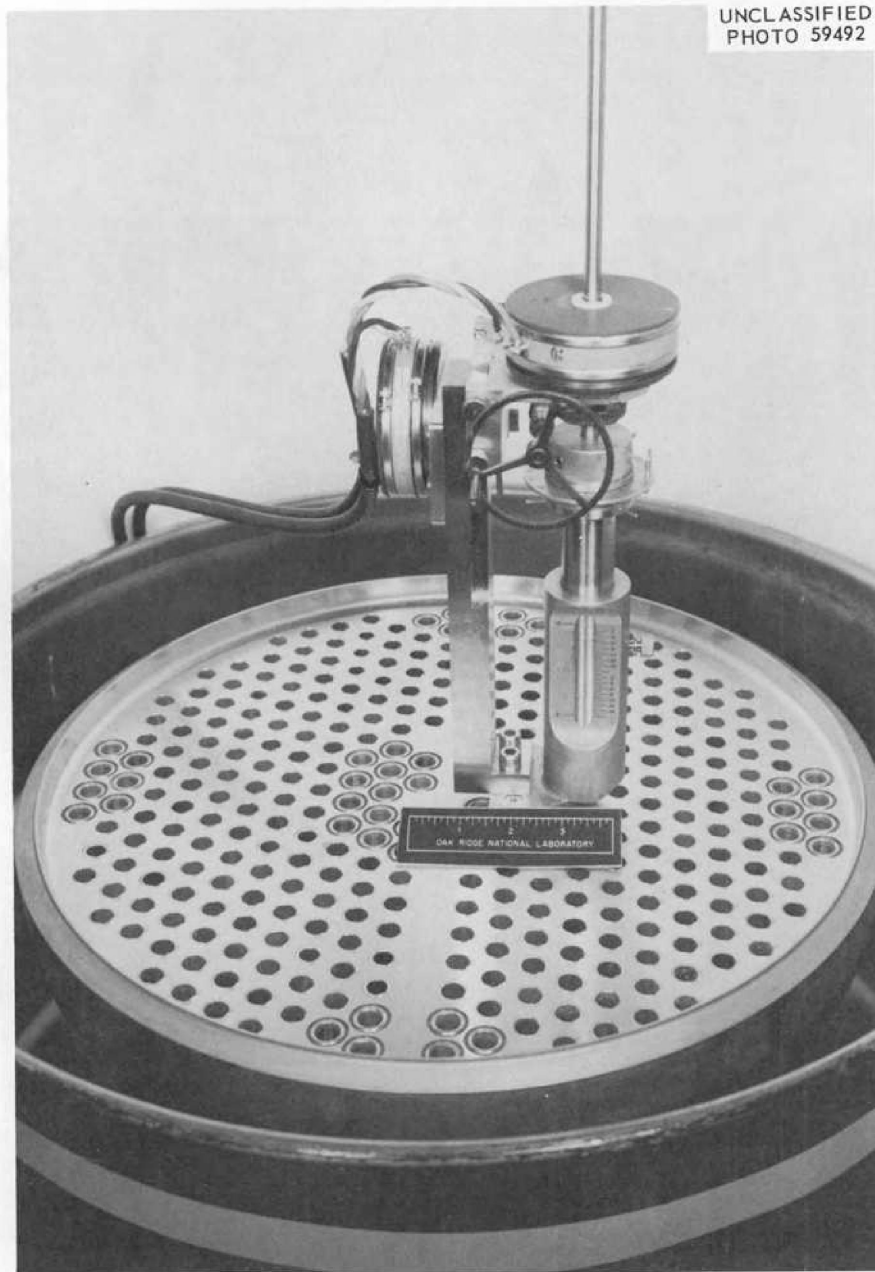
Ultrasonic Probe Device Set up on Sample Heat Exchanger To Inspect Tube-To-Tube Sheet-Brazed Joints.
